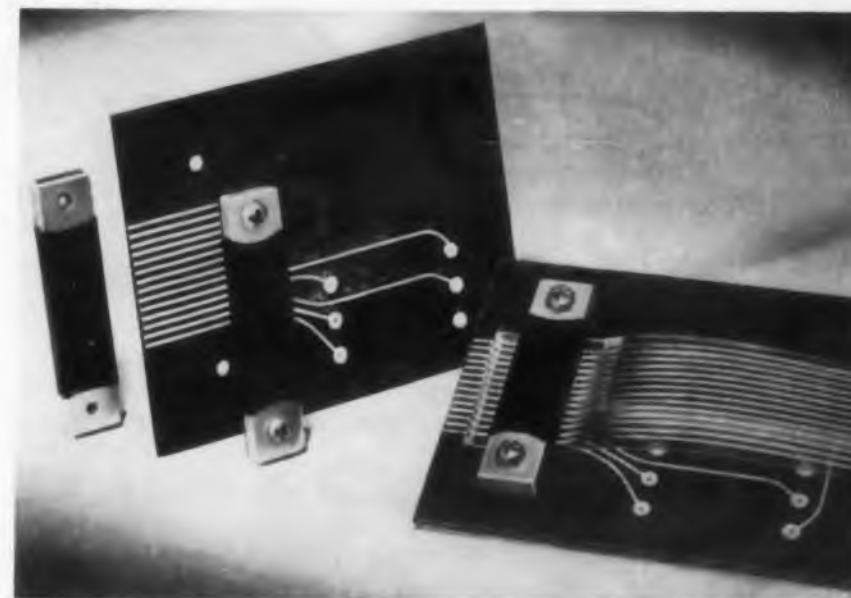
(right) The "bar" strain relief can be used to distribute the mechanical load across the width of the cable.
